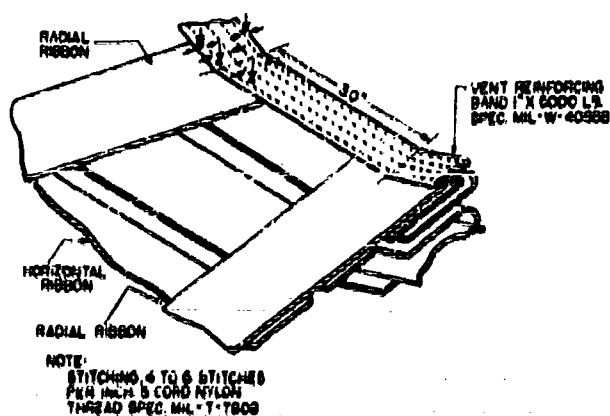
Exploded View of Vent Construction, FIST Ribbon Type Parachute Canopy 8.61 Ft. Diameter
